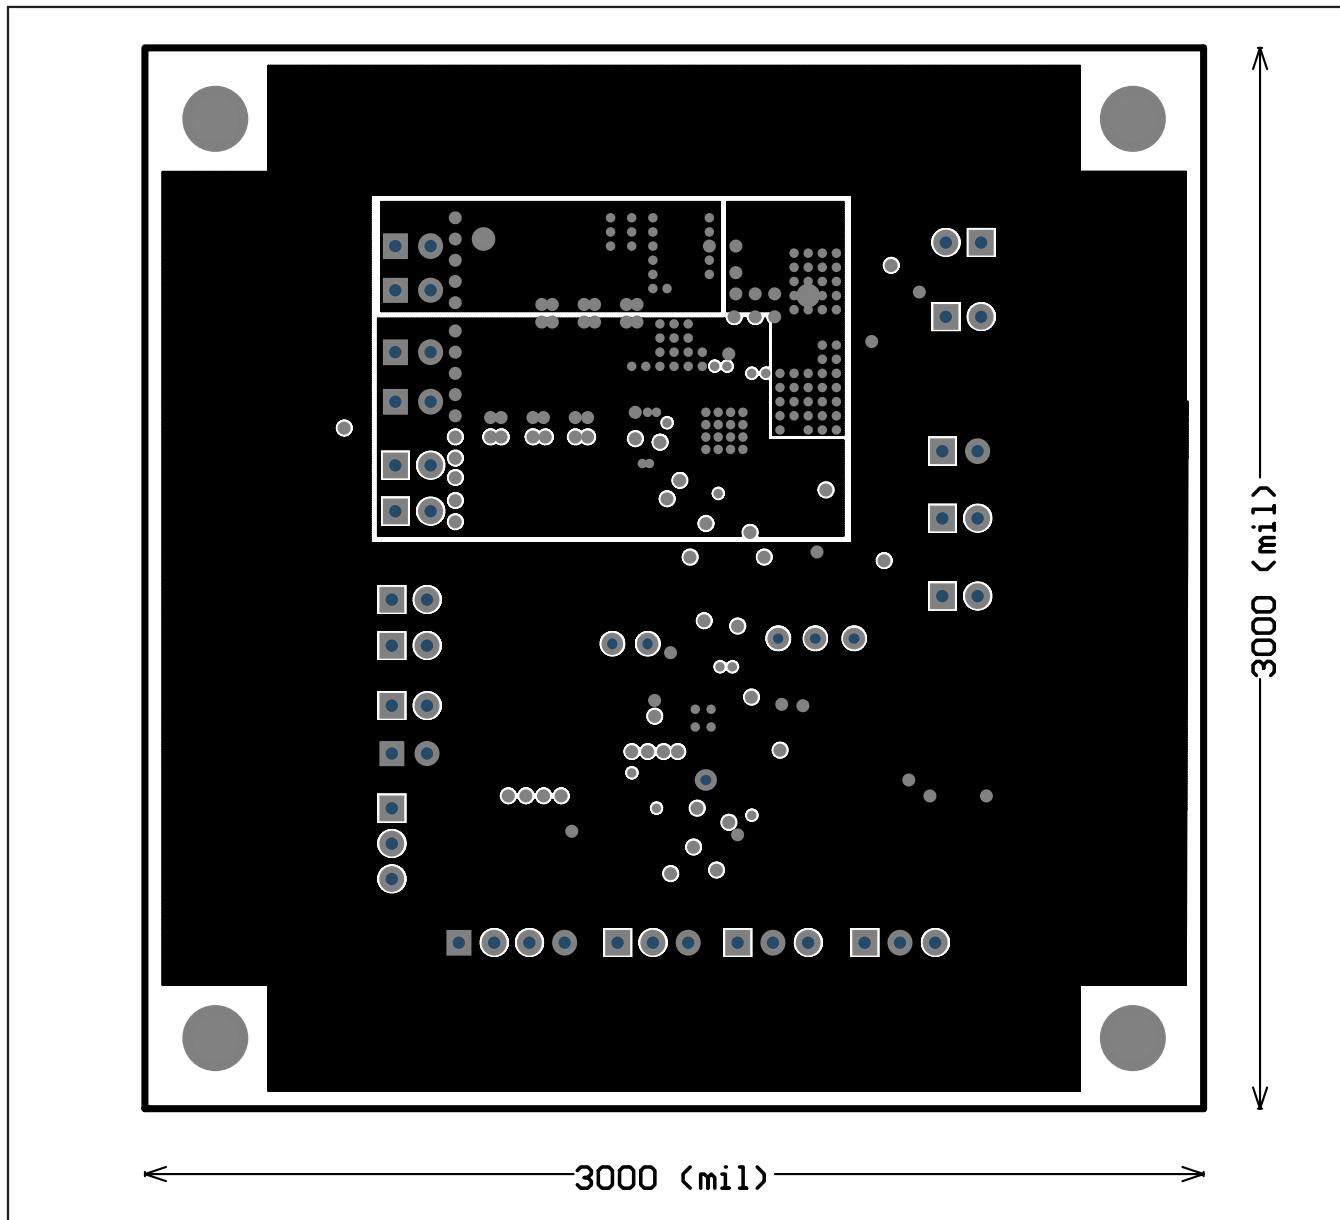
MAX8654 EV Kit PCB Layout—Inner Layer 2
